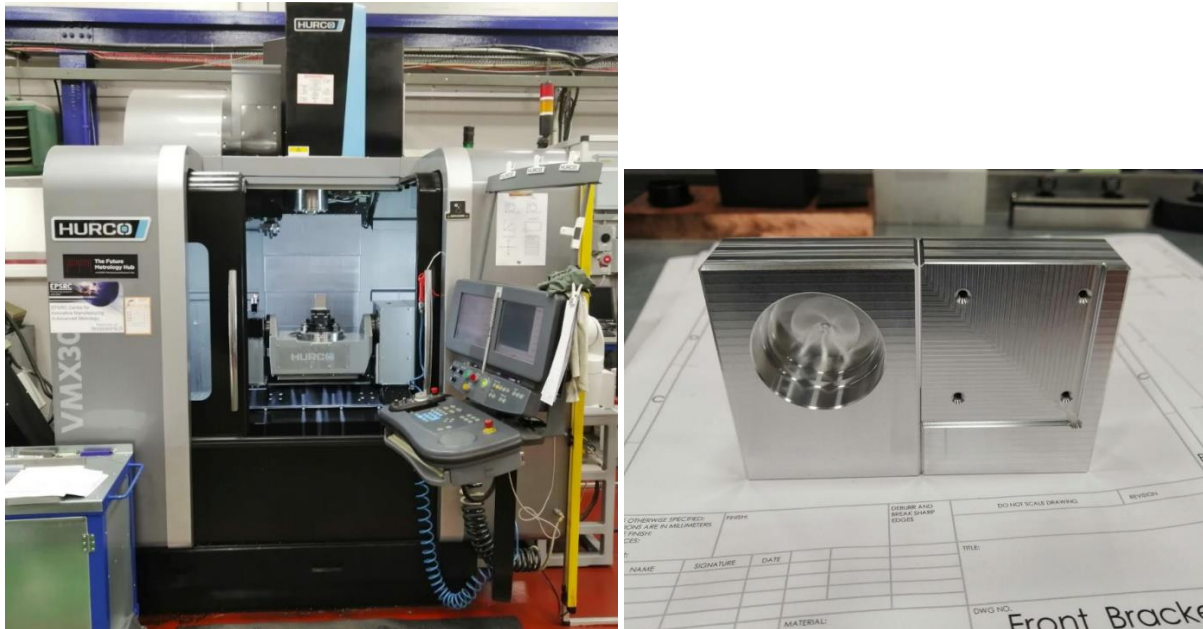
Manufacturing Images. Left: 5-axis CNC milling system. Right: Freshly manufactured front and end brackets.
